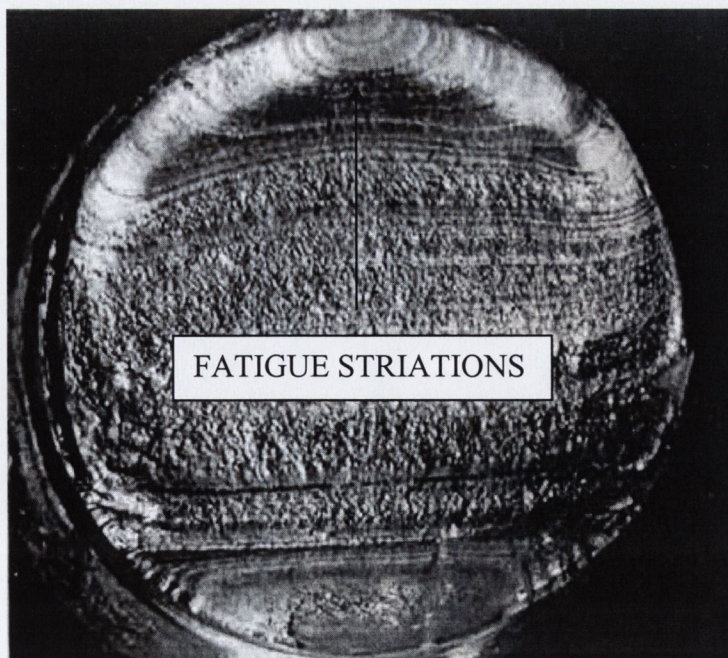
Fracture surface attributed to fatigue failure [75].
